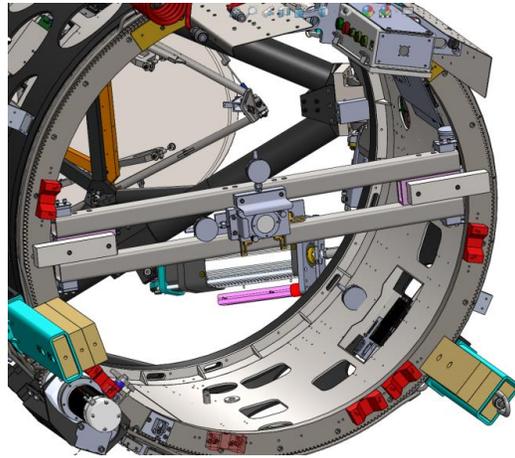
Ring gear attachment with OM3 on tip/tilt/translation stage
